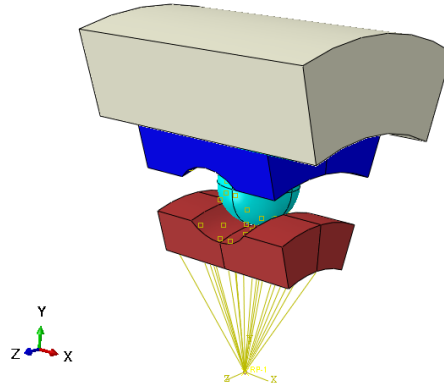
Three-dimension Sub model of deep groove ball bearing.
